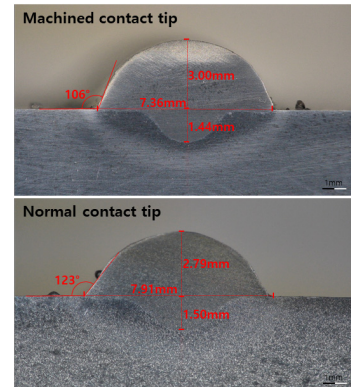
Macro-photograph of a sectioned bead geometry: machined contact tip(up) & normal contact tip(down)
